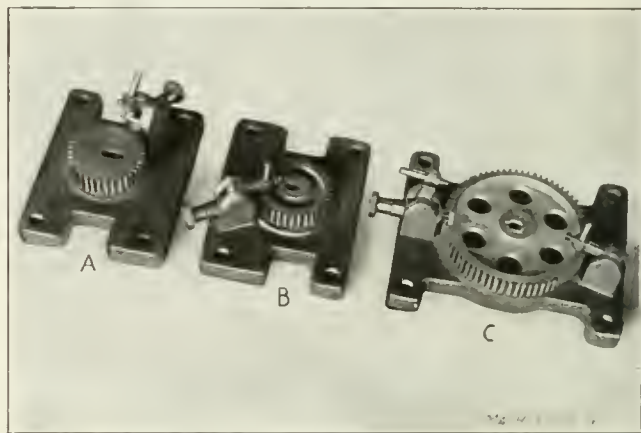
Keyseating Fixture used for Holding and Marking the Gears
